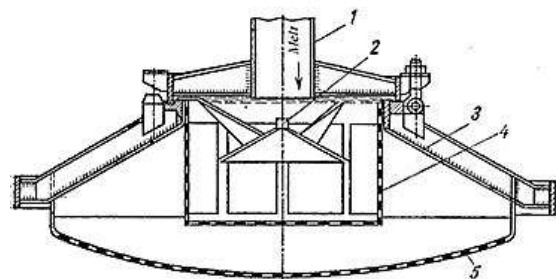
Static priller: 1 – supply nozzle; 2 – guide cone; 3 – priller casing; 4 – filter screen
